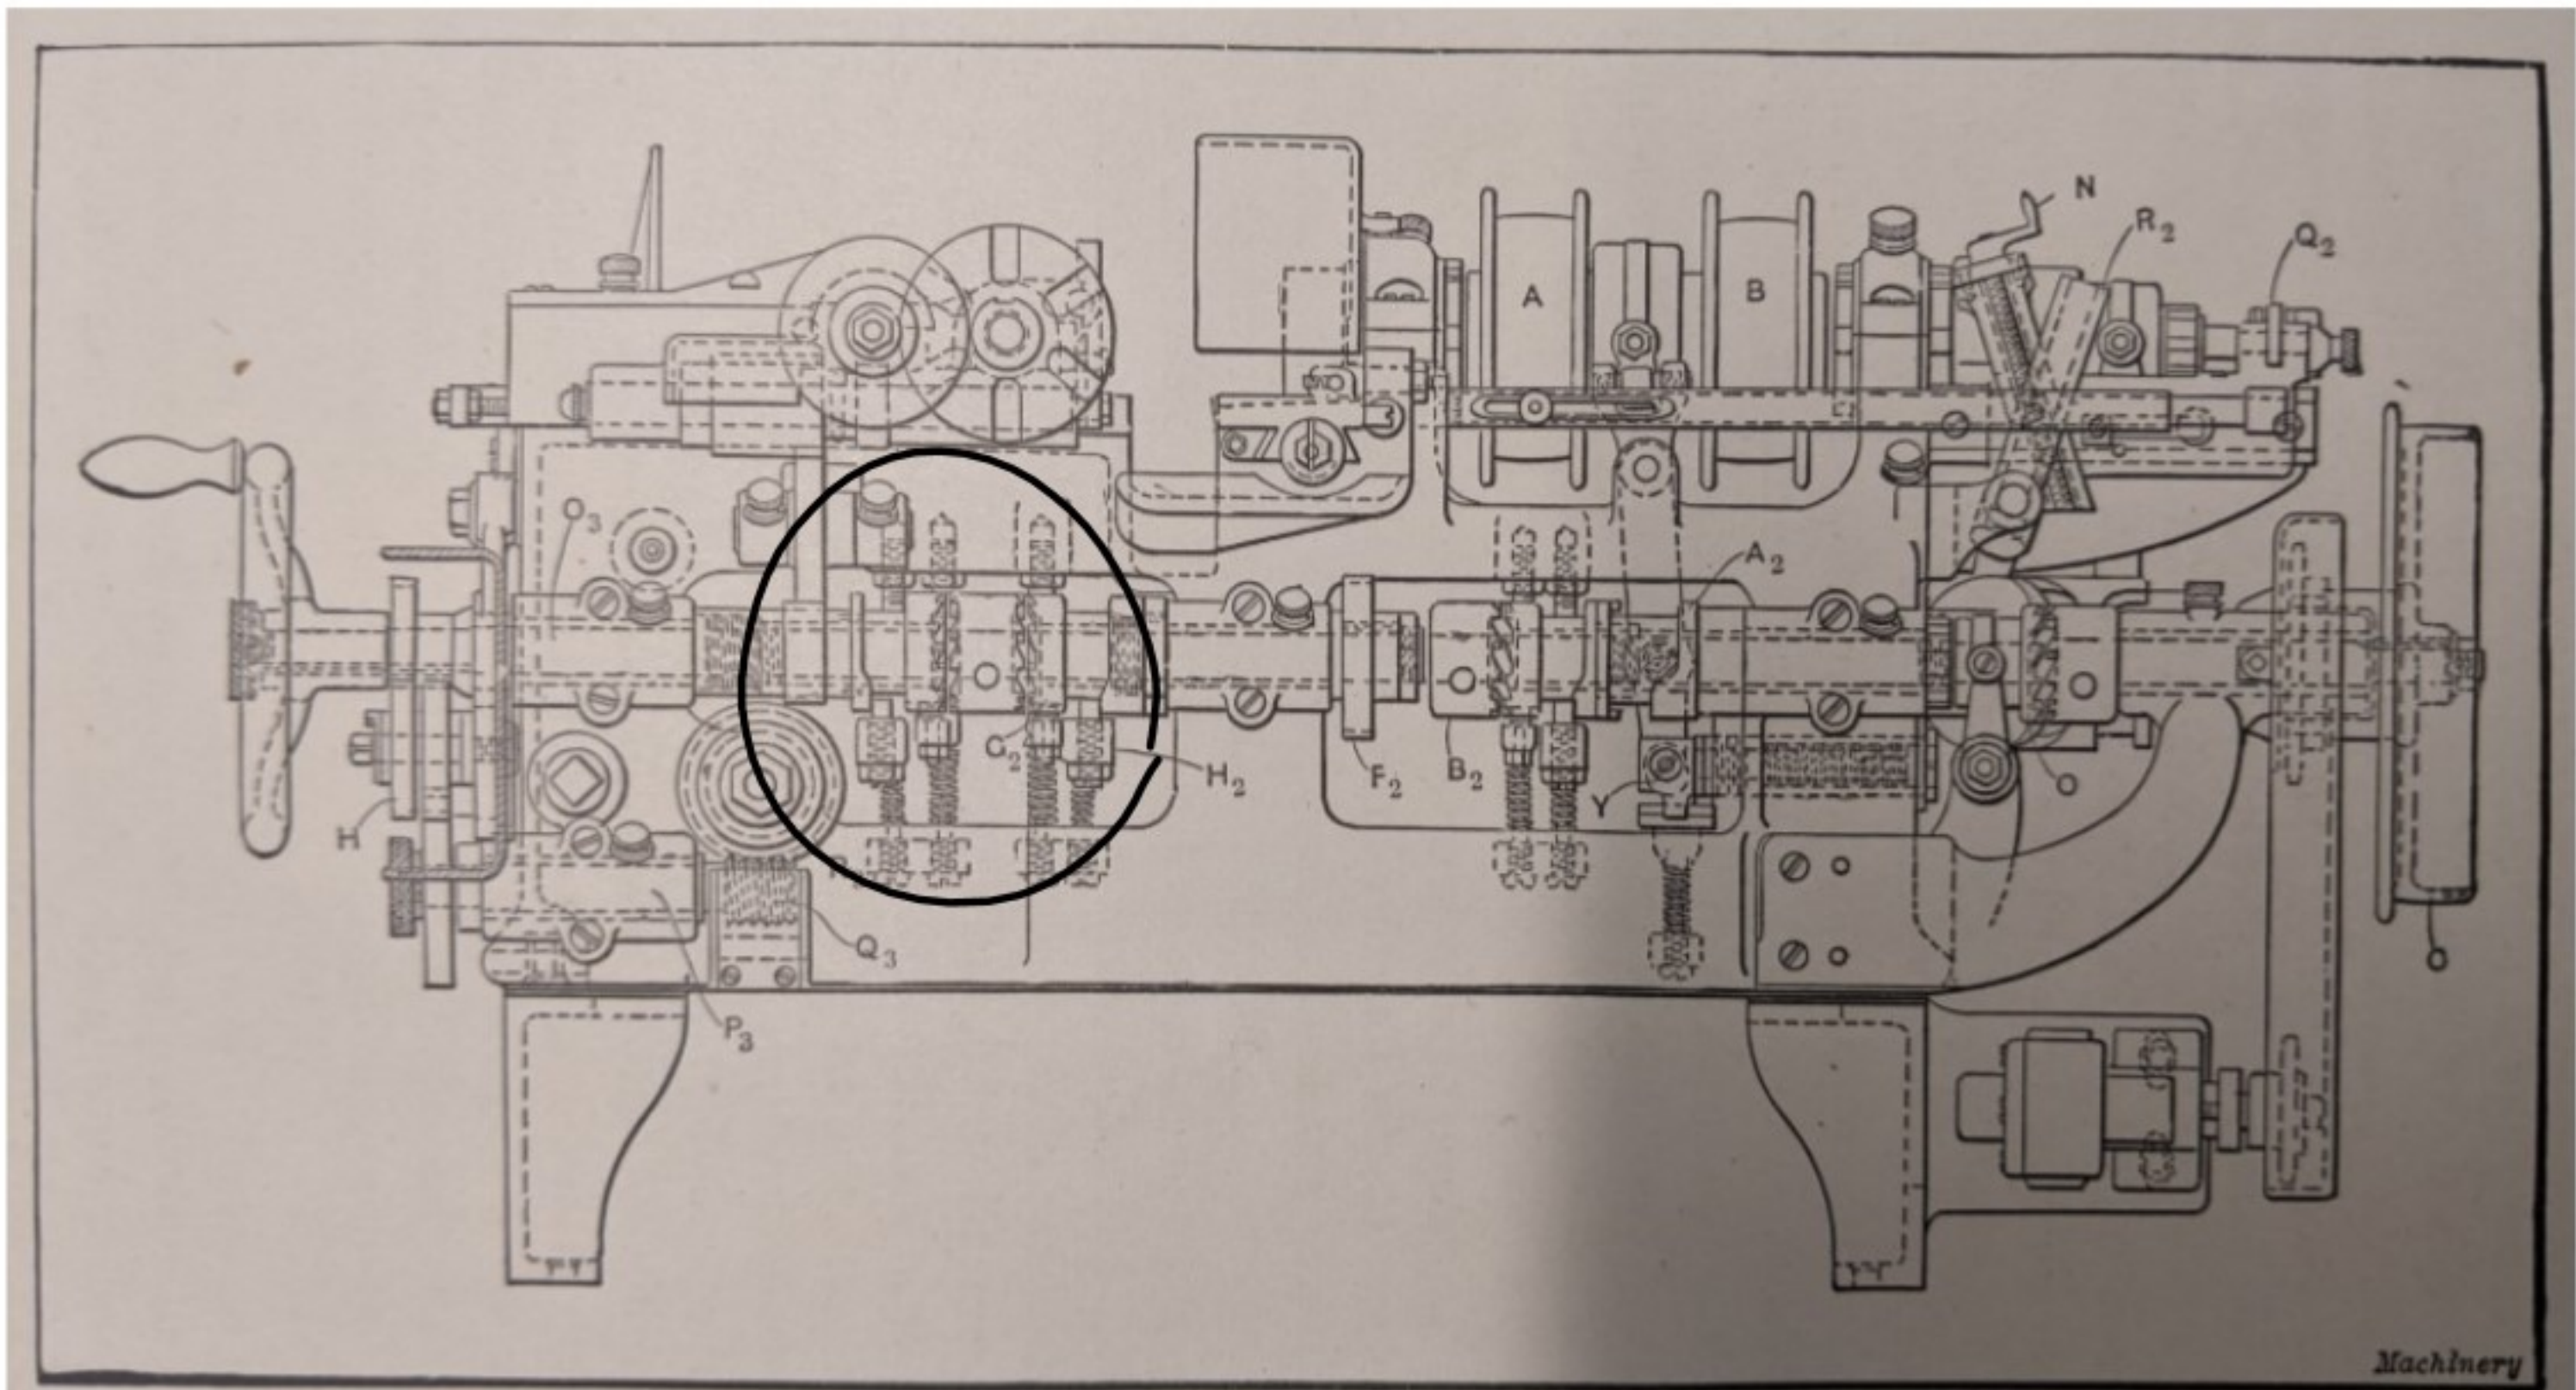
Rear Elevation of the No. 00 Brown & Sharpe Automatic Screw Machine
